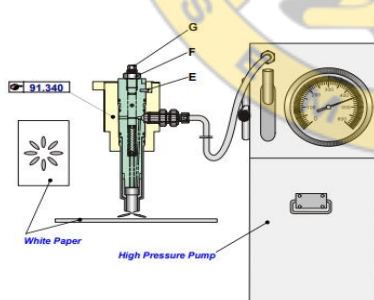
Functional test of fuel injection valve (연료 분사 밸브의 기능 시험)
